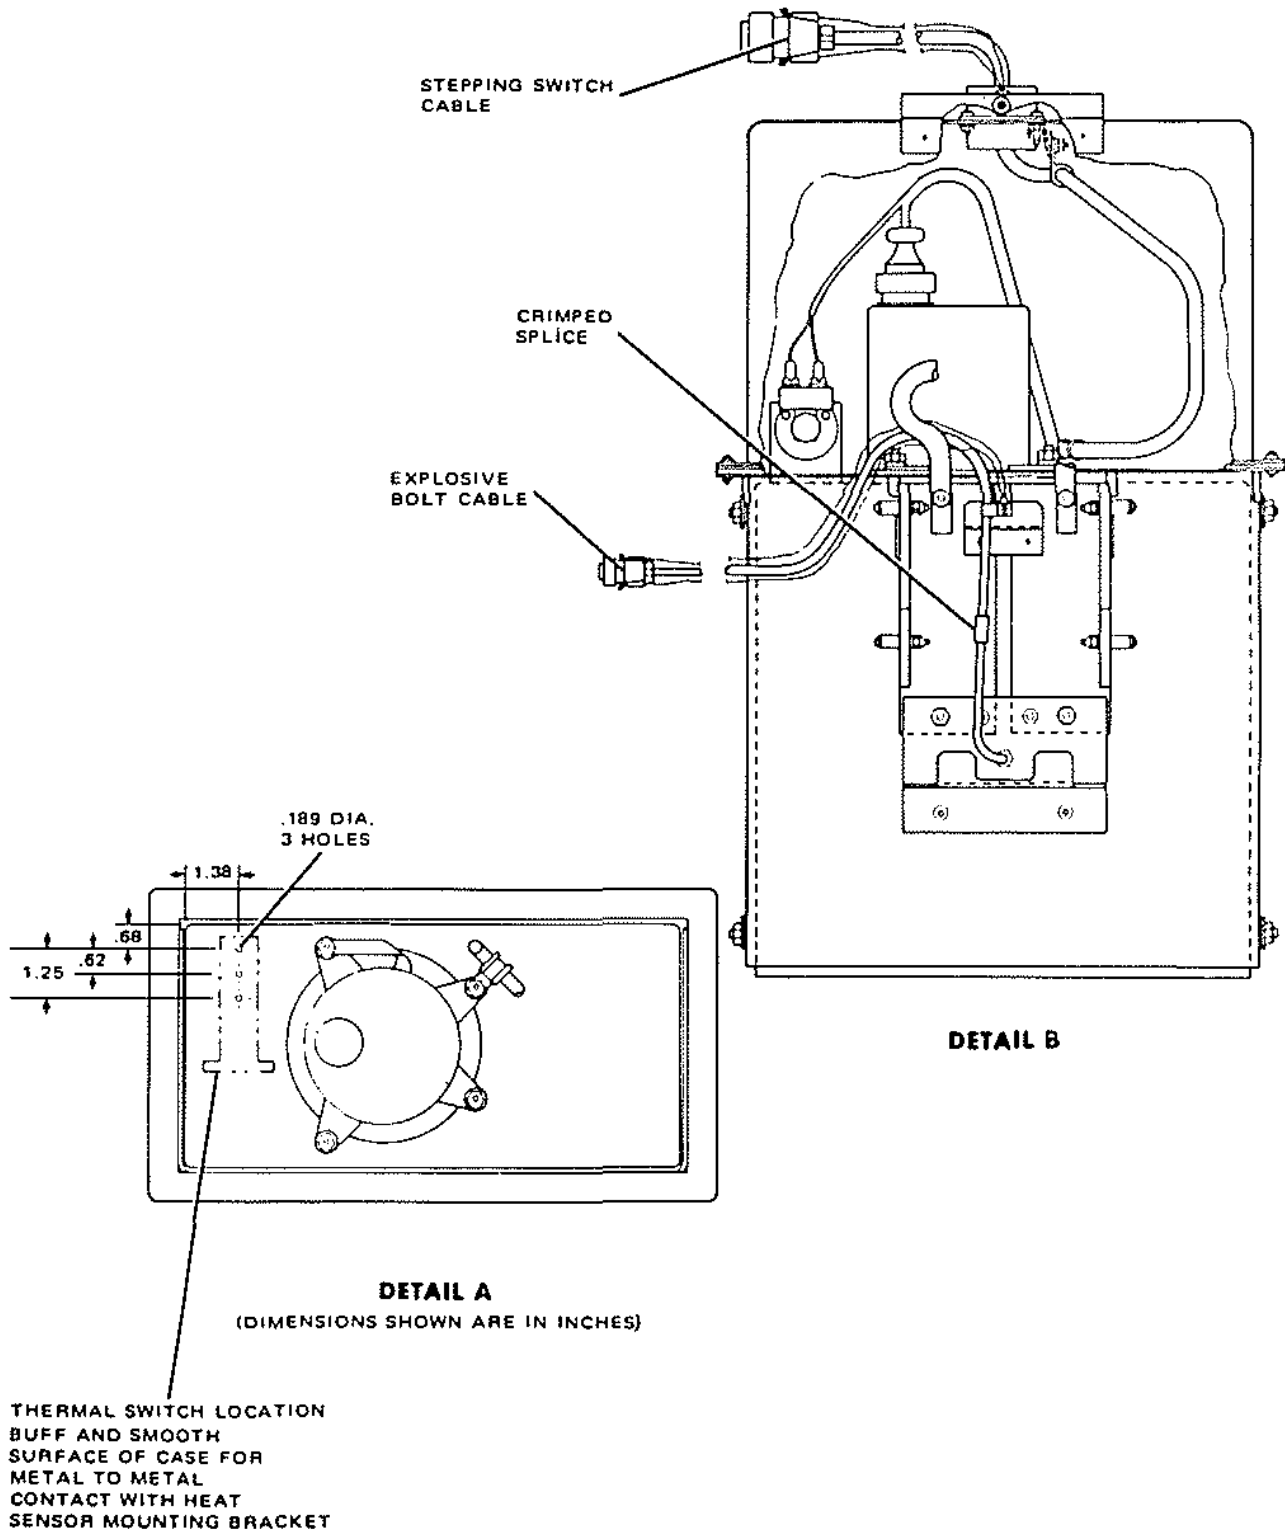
Flare Case Assembly Thermal Switch and Cable Locations
